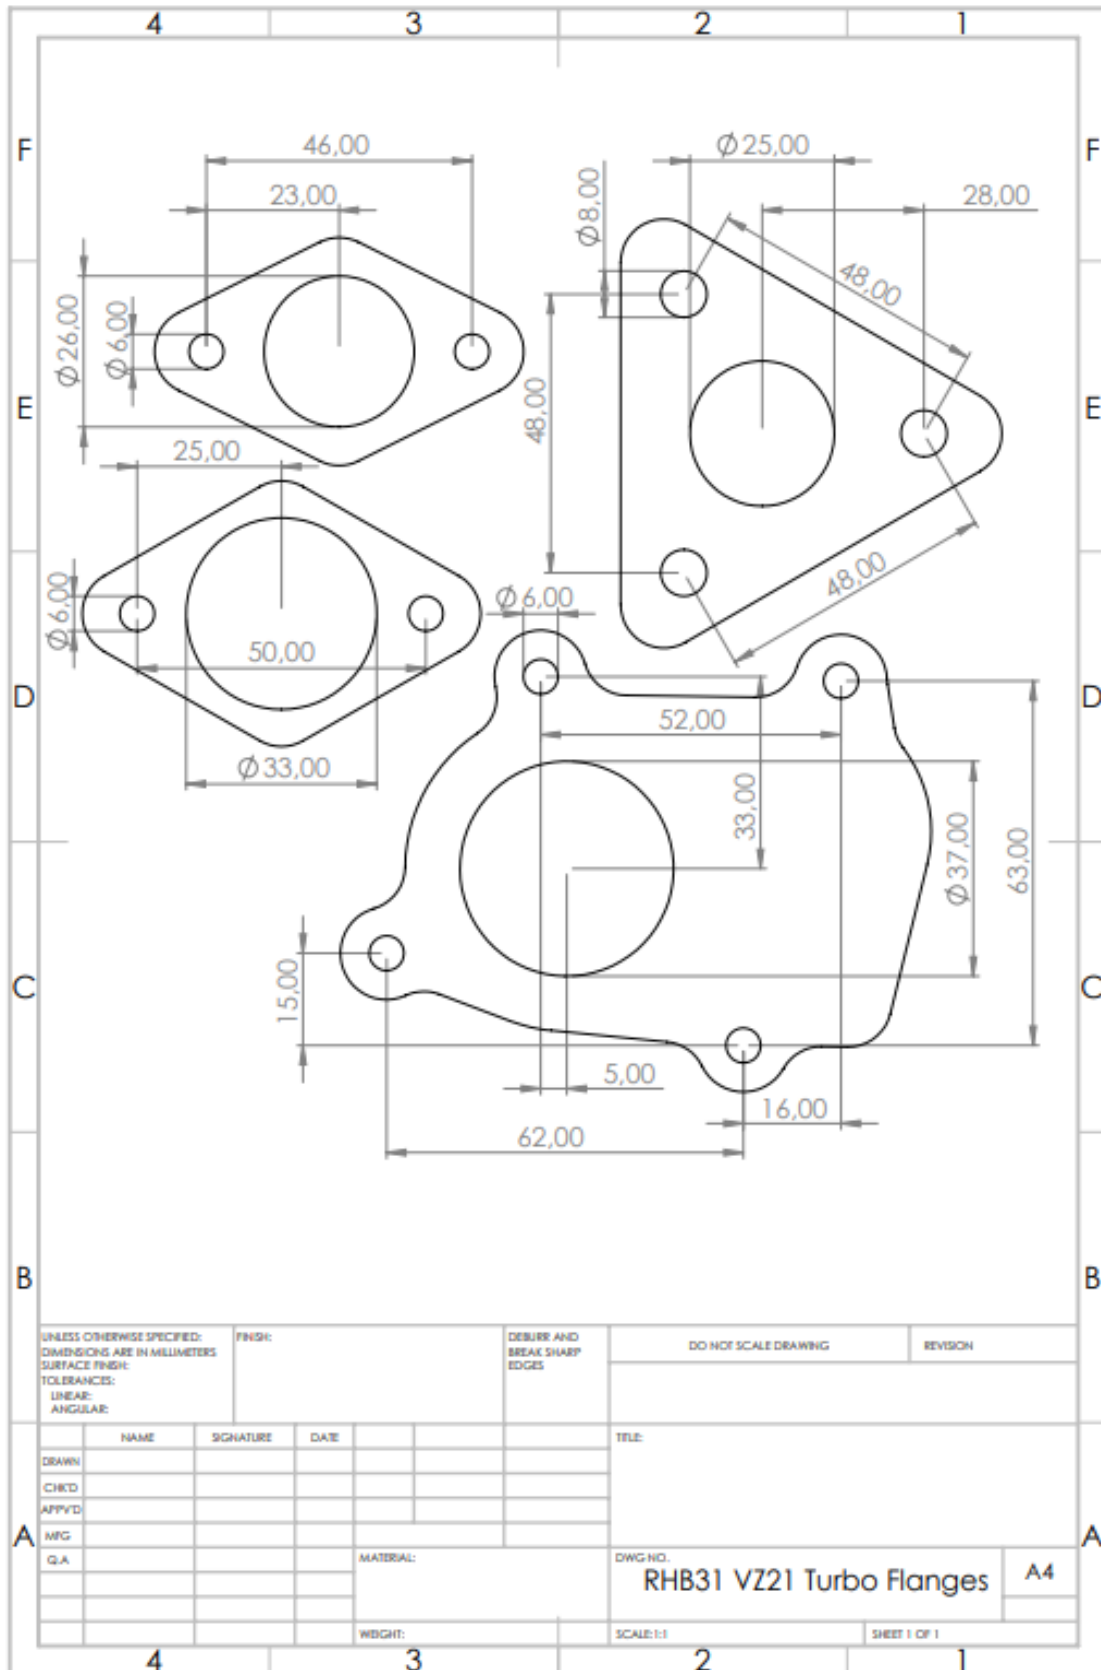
RHB31 VZ21 turbo flanges 2D design
